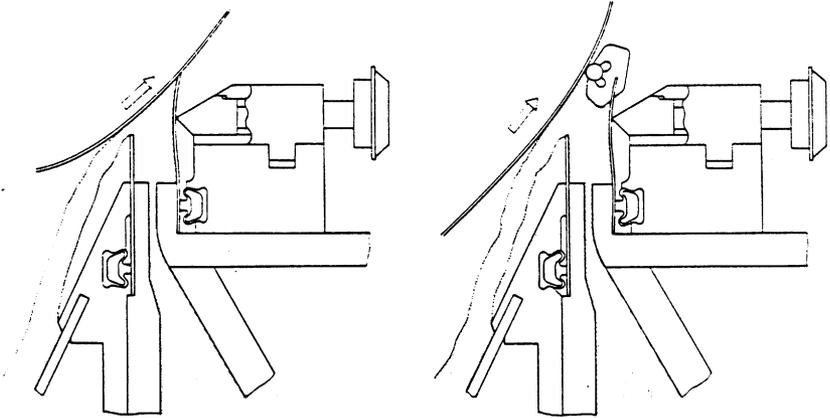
Short-dwell coater with a. bevelled blade, b. rotating rod for coat weight adjustment.
